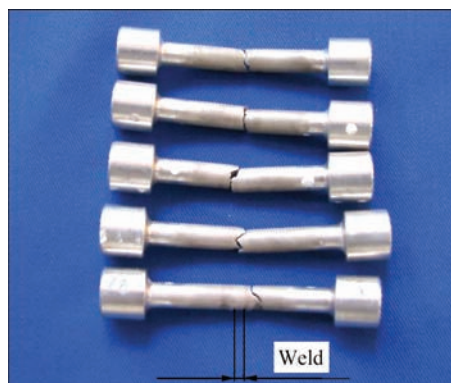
Specimens after mechanical breaking tests of welded joints of ML10 magnesium alloy
